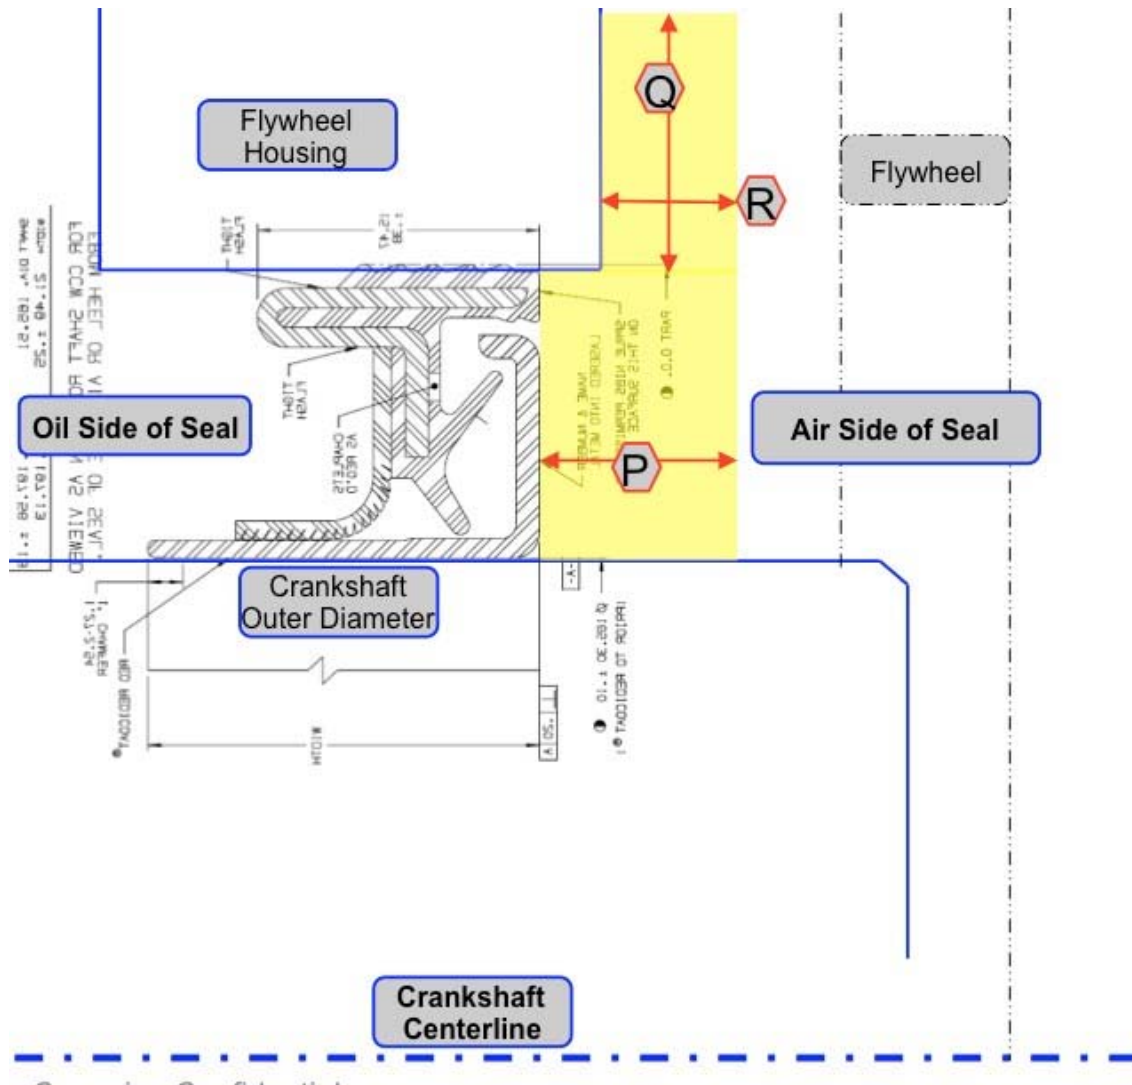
Schematic of rear crankshaft seal and its adjacent components. [2]
